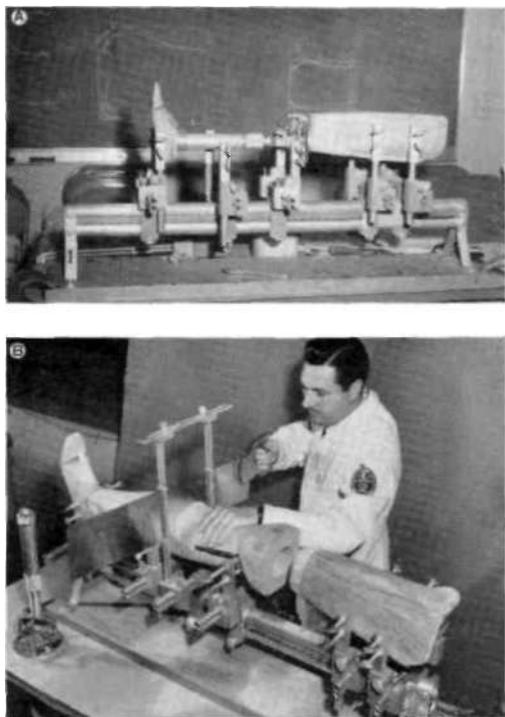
Alignment duplication jig. A, Adjustable leg mounted in jig. B, Adjustable leg has been removed and wooden set-up substituted. Prosthetist is sawing shank to proper length.
